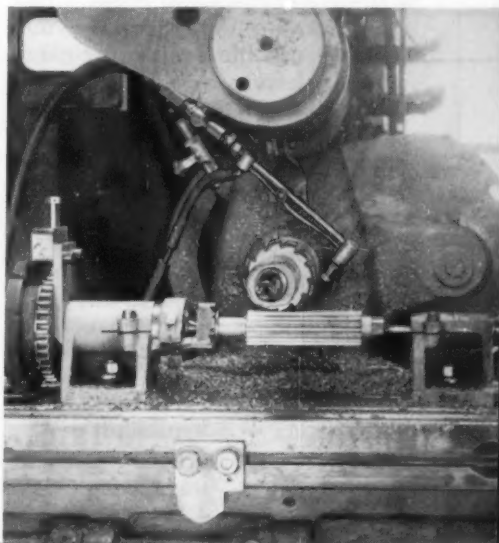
Hobbing several gears at once. Cutting fluid reduces pressure of tool on the work and eliminates springing of the arbor.
